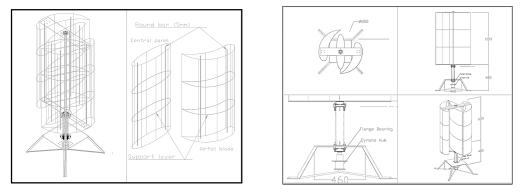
Skeletal and detailed ACAD drawing of the prototype
